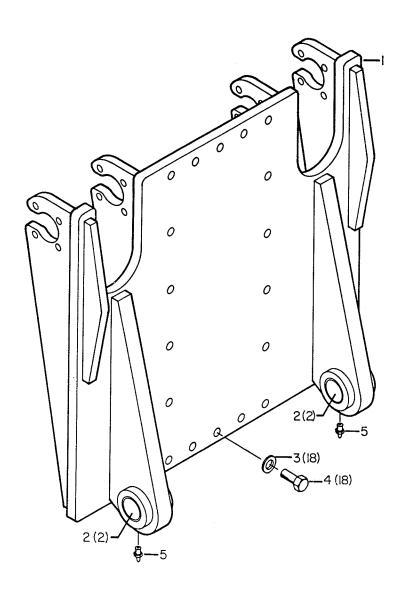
WELDMENT PART NUMBER LOCATIONS
